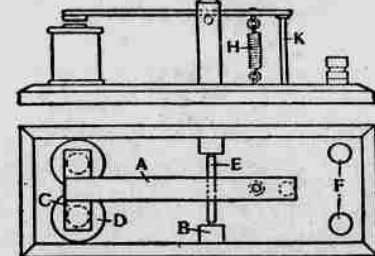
Sounder—A, brass; B, wood; C, soft iron; DD, coils wound with No. 24 wire; E, nail soldered on A; FF, binding posts; H, spring.
